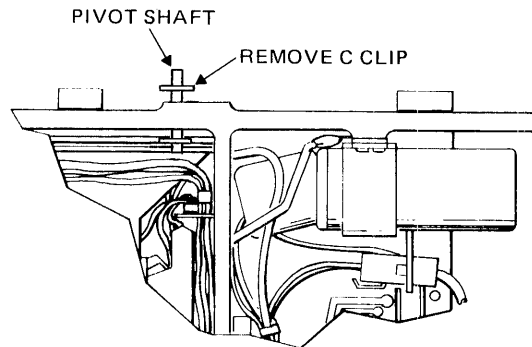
CARTRIDGE GUIDE REMOVAL
